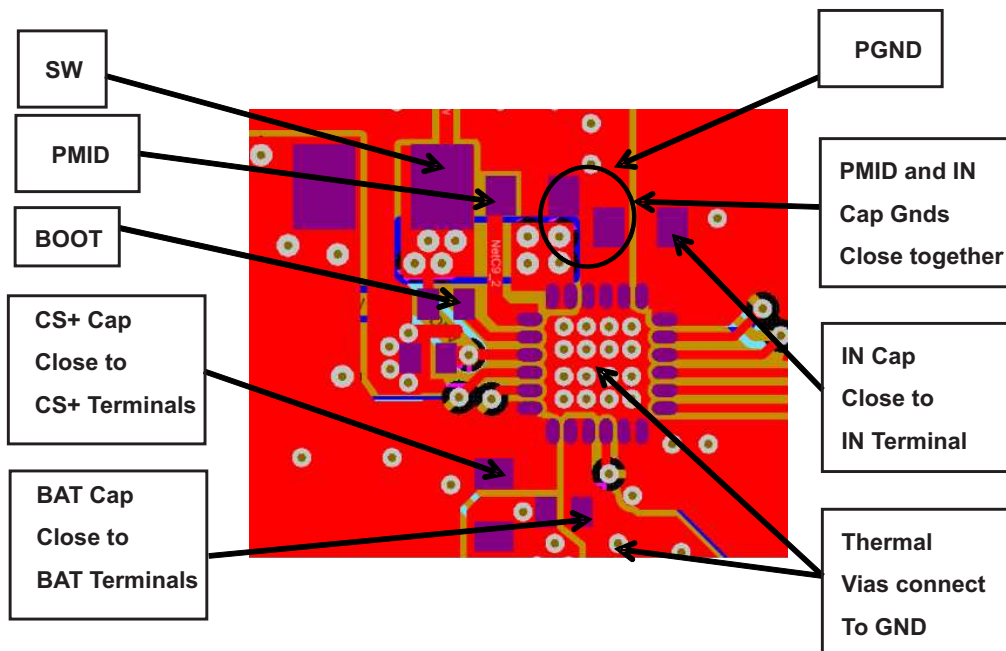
Recommended bq24187 PCB Layout For QFN Package
